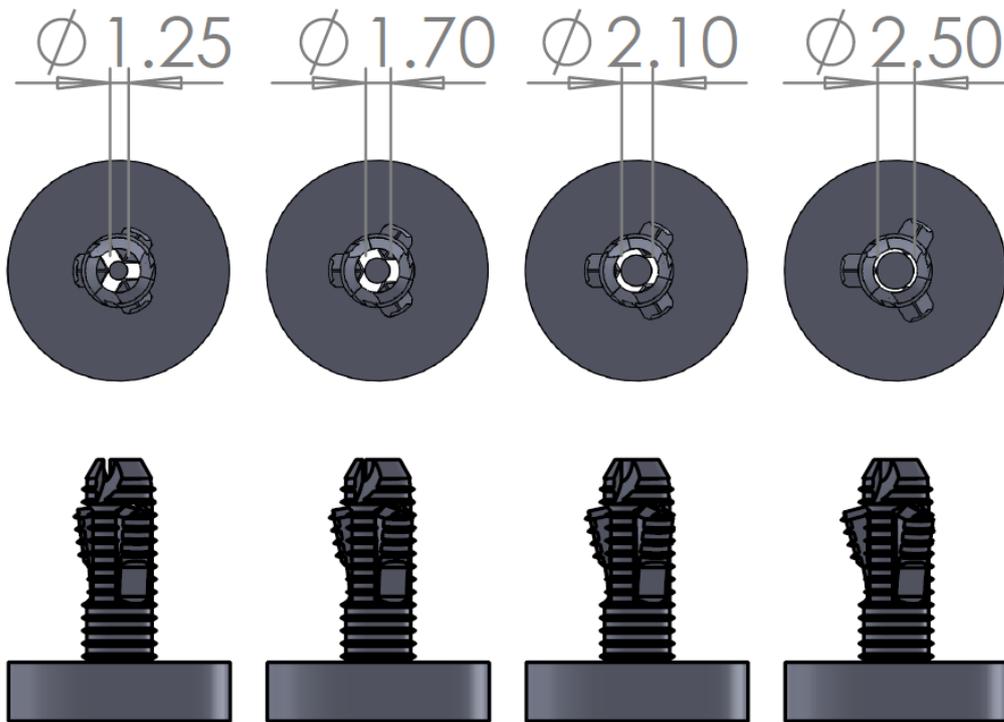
A single sample was able to test multiple expansion sizes by using different diameter expansion pins ranging from 1.25 mm to 2.50 mm providing expansion sizes ranging from 37% to 65% increase in outer diameter
